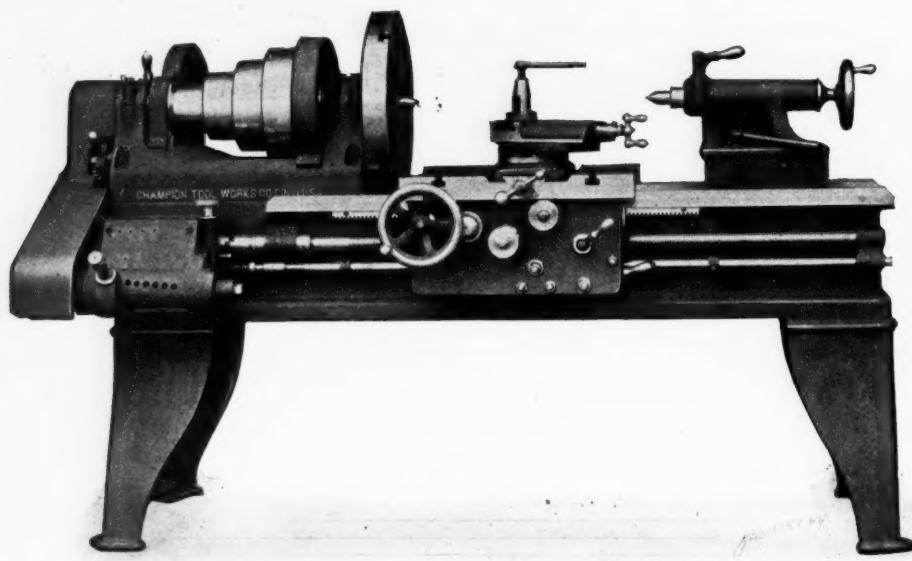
Sixteen-inch Champion Lathe with Gear Box Mechanism giving Forty Changes
